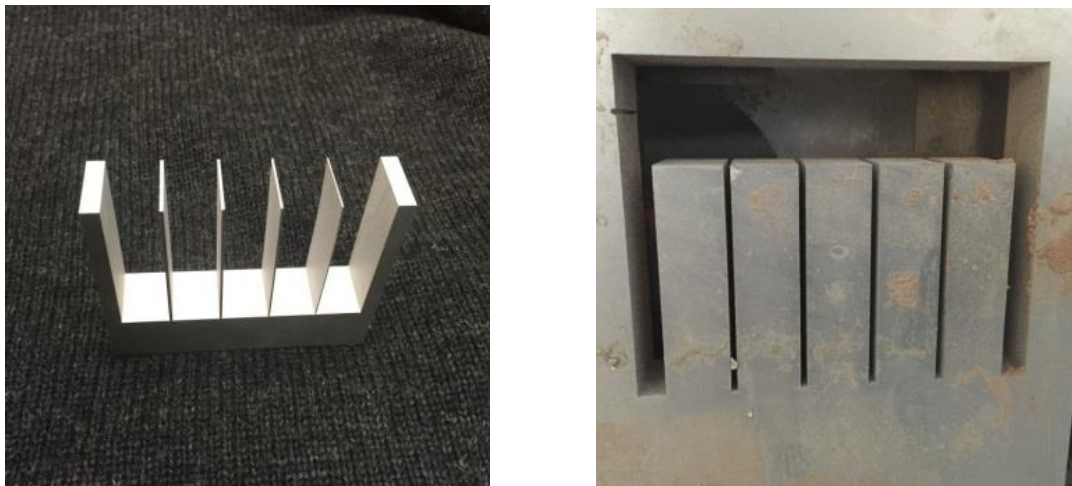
Abrasive waterjet cut component (left) and revert potential (right)
